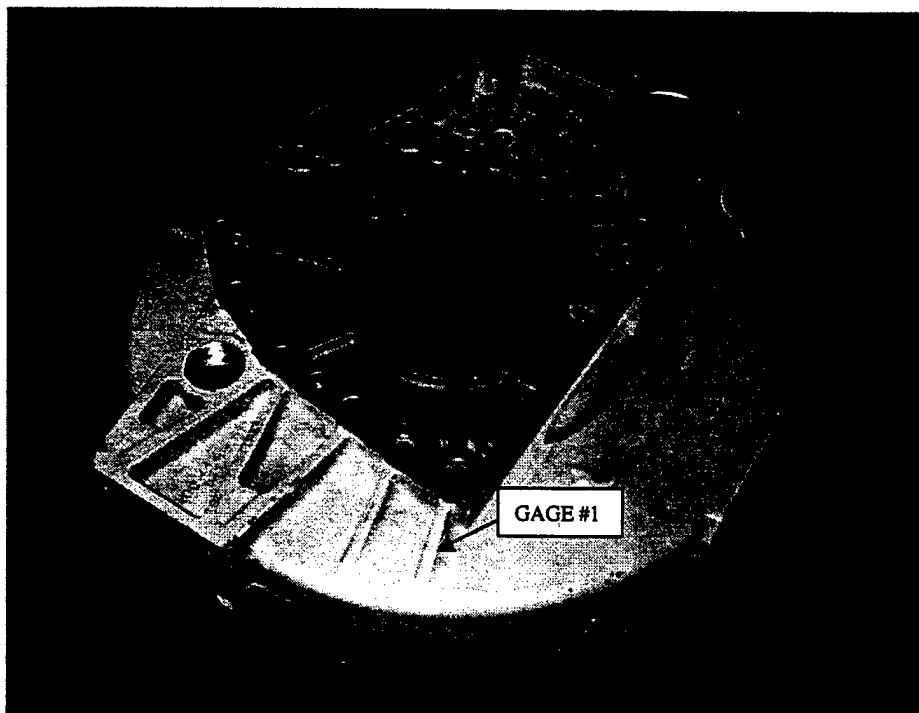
Photograph of original CAT flywheel housing gage location #1(engine side shown)
